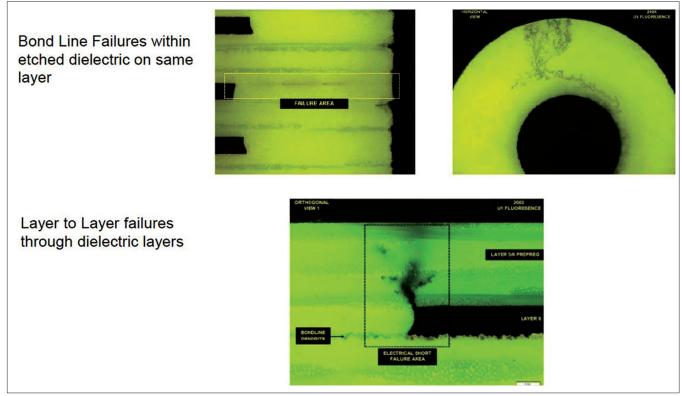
THB test with 450 V at 85 °C, 85% rH showing failures in the inner layers of a printed board [7]
